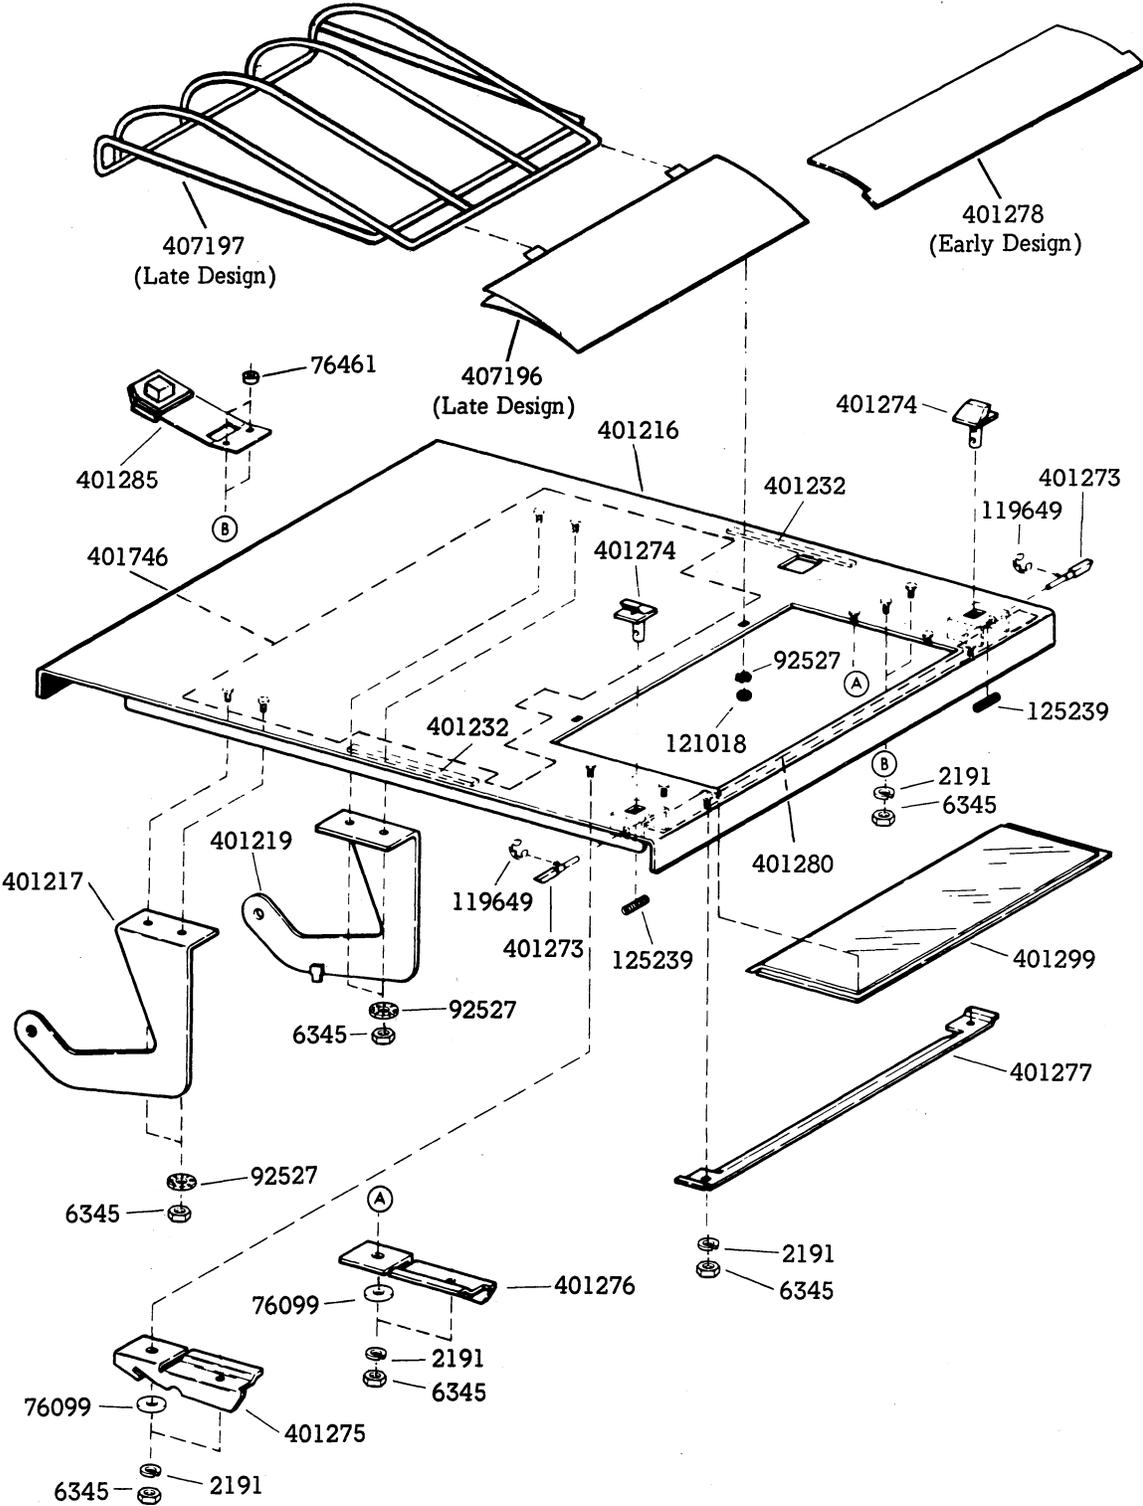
CAB201/ZZ Printer Cabinet Core for Adjacent or RO Friction Feed Printer (Cont)
